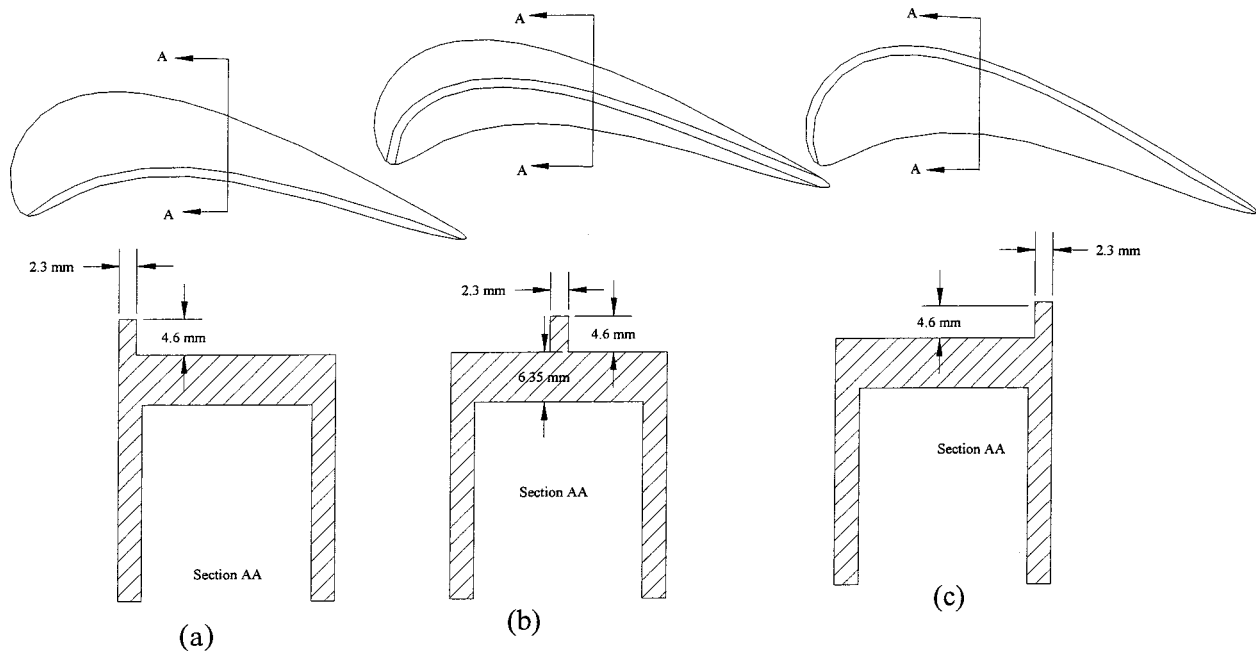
Removable squealer tip-various one-sided squealer geometry
